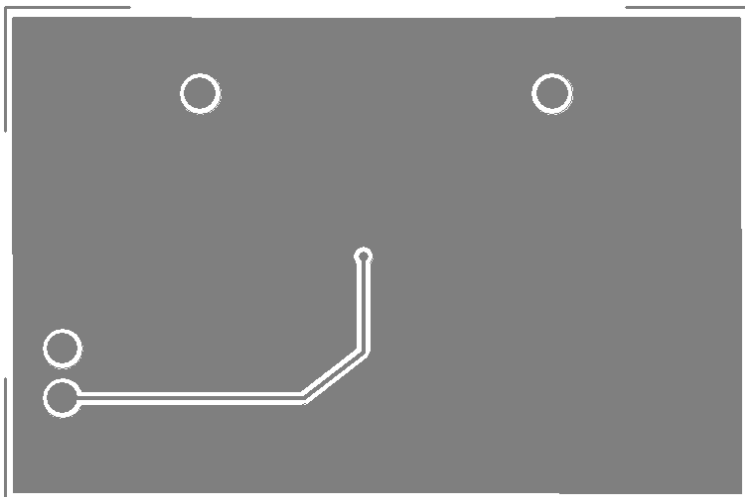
SP6659EB PC LAYOUT BOTTOM SIDE
